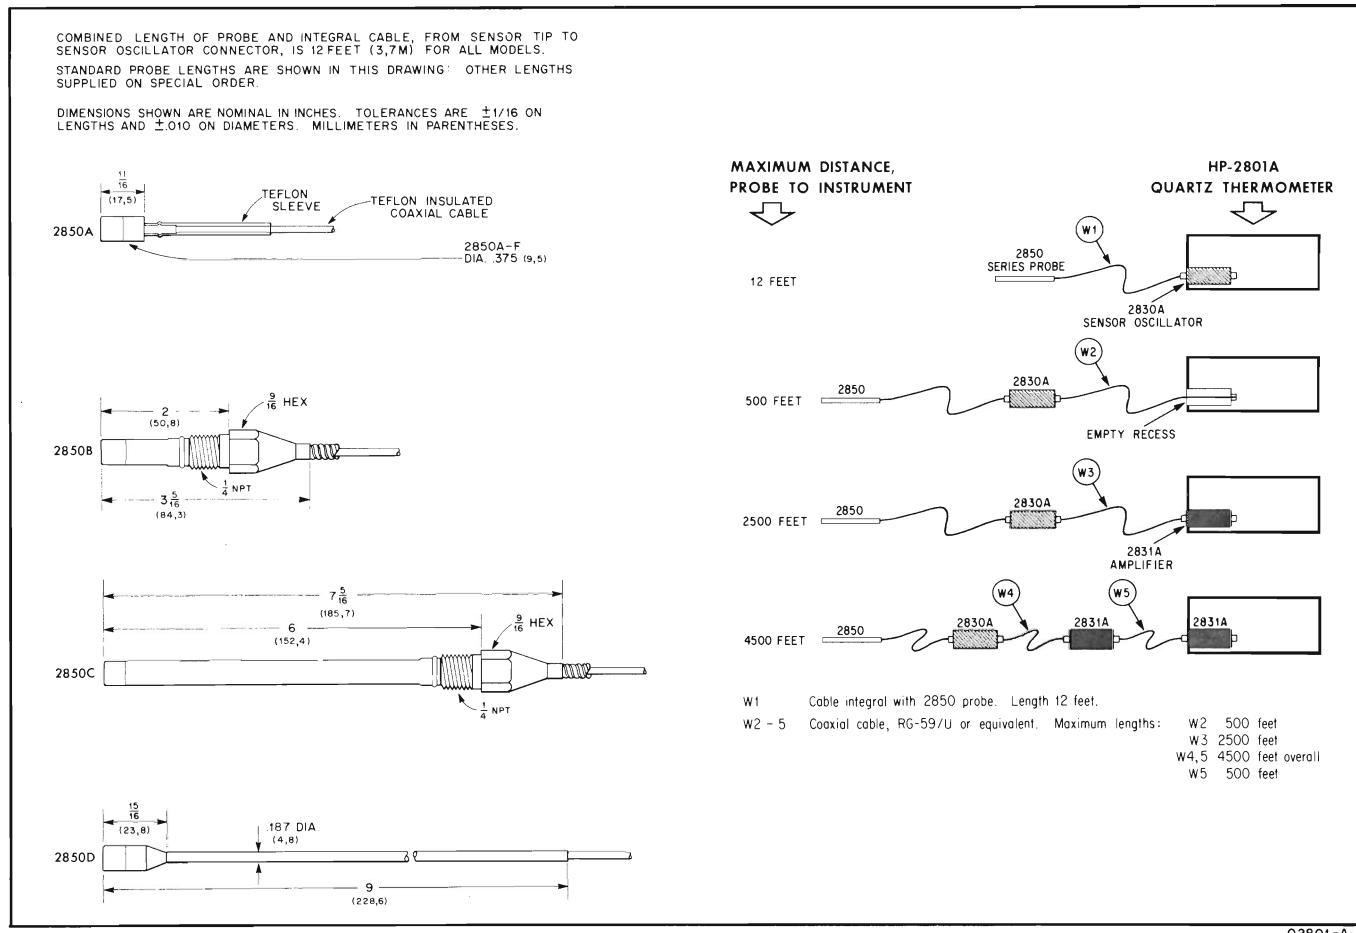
Probe Configurations and Extension Cable Arrangements
